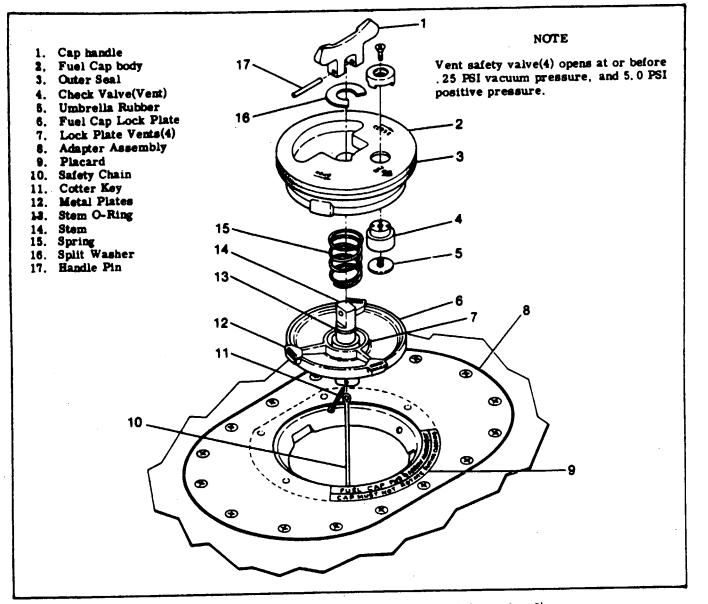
Fuel Filler Cap (Red Plastic) (Sheet 2 of 2)
